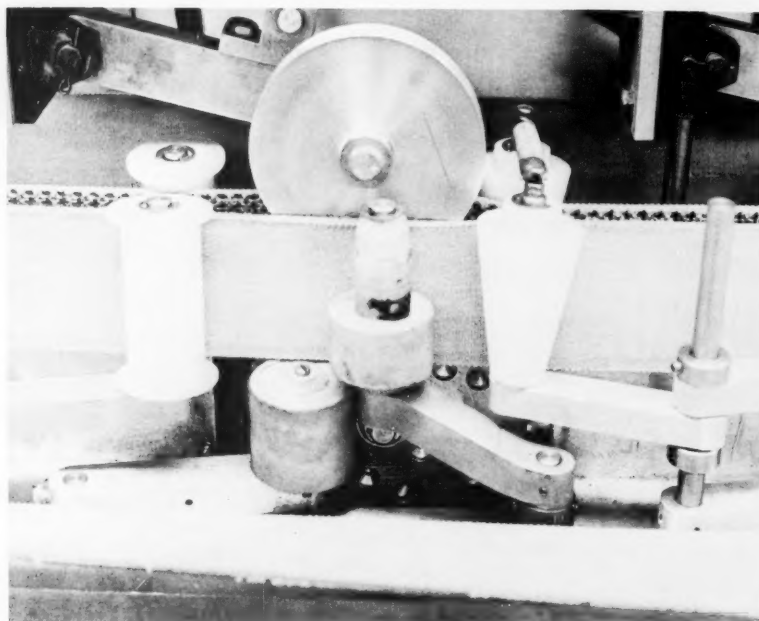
The section of the modified machine showing the aluminum cleaning wheel with the fish hold-down roller and soft rubber wheels to press the inside of the fish against the cleaning wheel.
